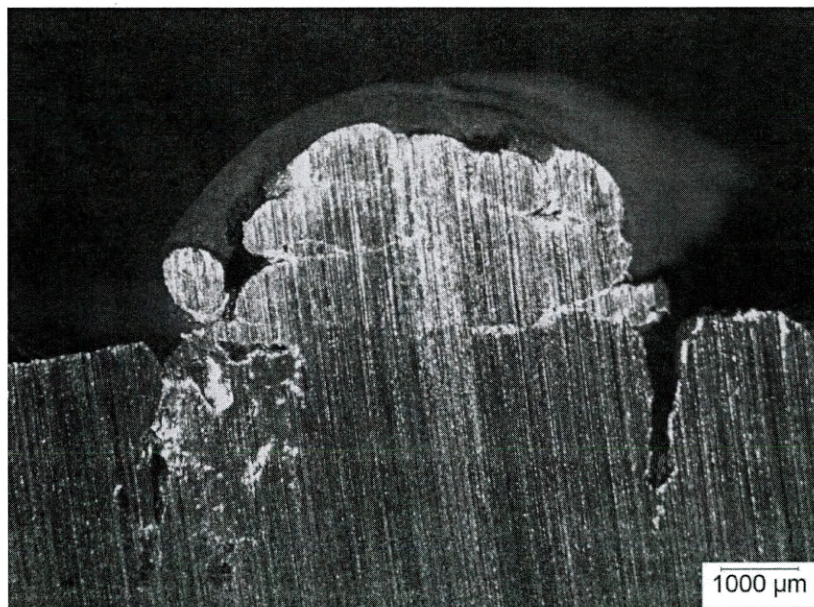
Cross section of initial braze test using silver-based filler metal. Filler metal remains confined to its initial morphology on the surface of the sample.
